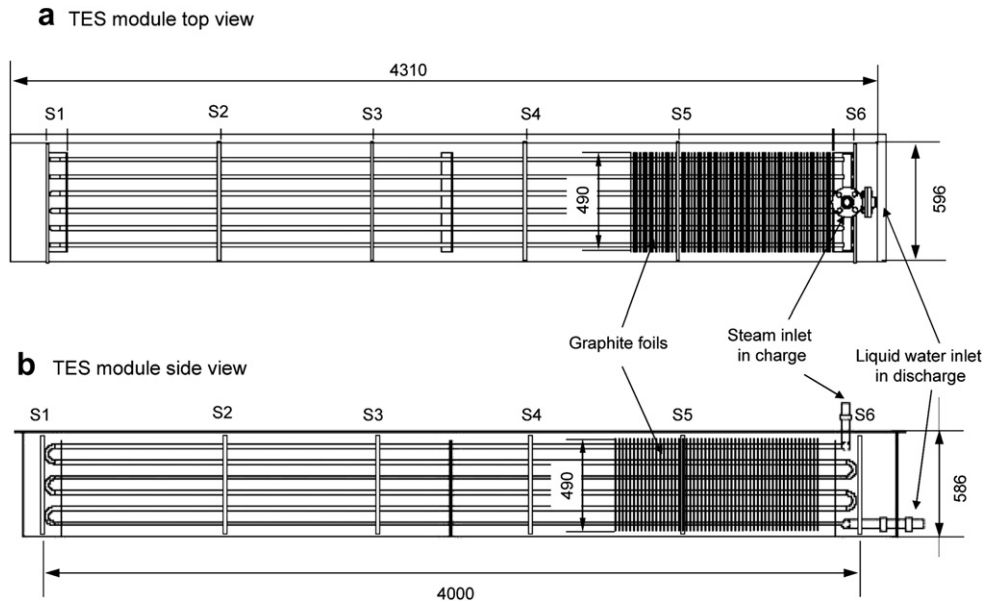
Sketch of TES prototype dimensions: (a) top-view and (b) side-view (All dimensions are given in mm).
